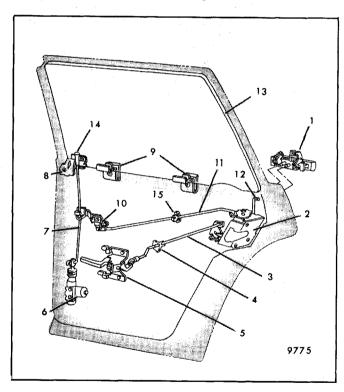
Rear Door Hardware - A-09,19 Styles
